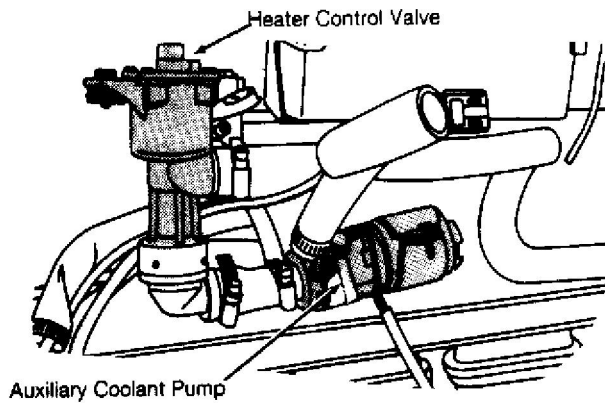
Heater Control Valve & Auxiliary Coolant Pump
